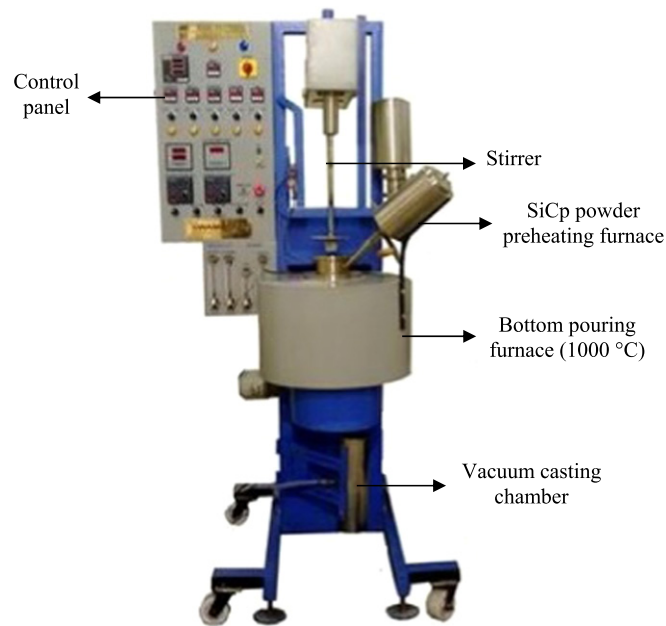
Bottom pouring stir casting furnace (Swamp Equip, India).
